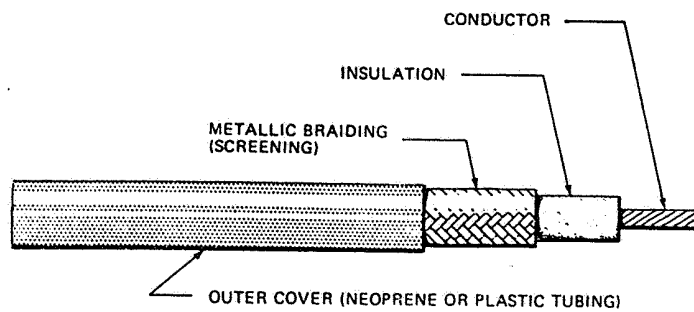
IGNITION CABLE WITH PROTECTIVE COVERING
